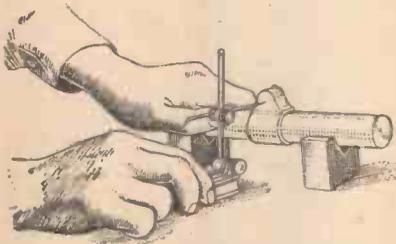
The casting being marked out above is to be drilled through the boss at a definite distance up from the centre hole.
